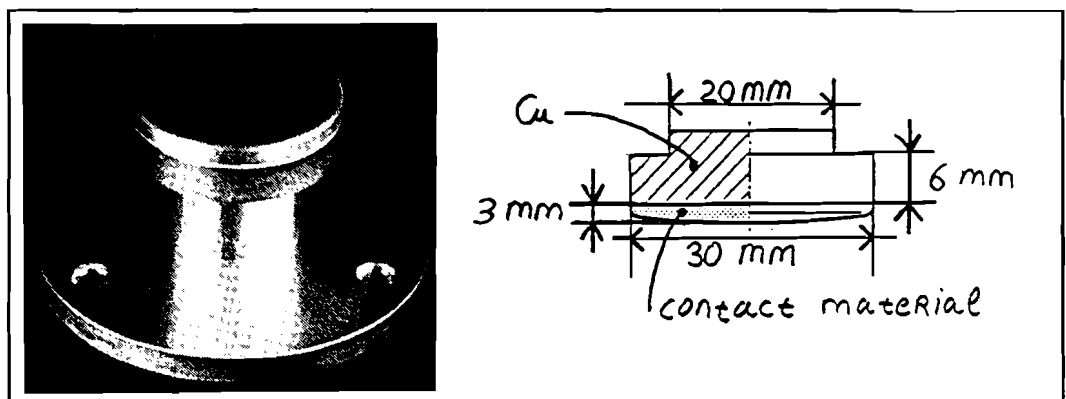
Photograph and drawing of the butt type contact used in this work.
